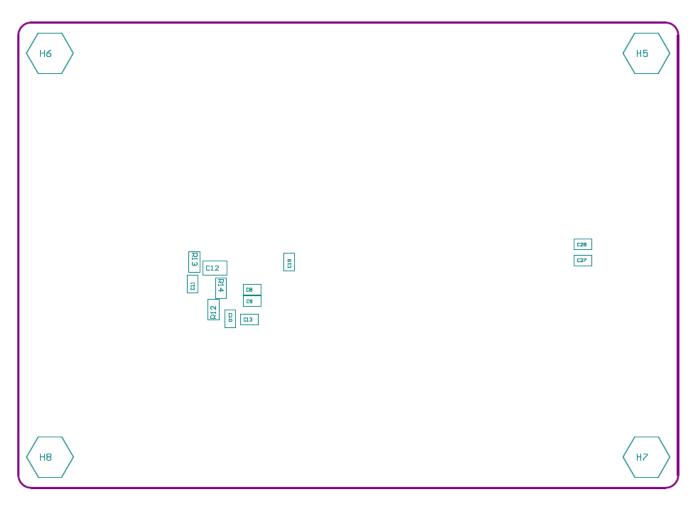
TS3DDR32611 EVM Bottom Layer Assembly Drawing
